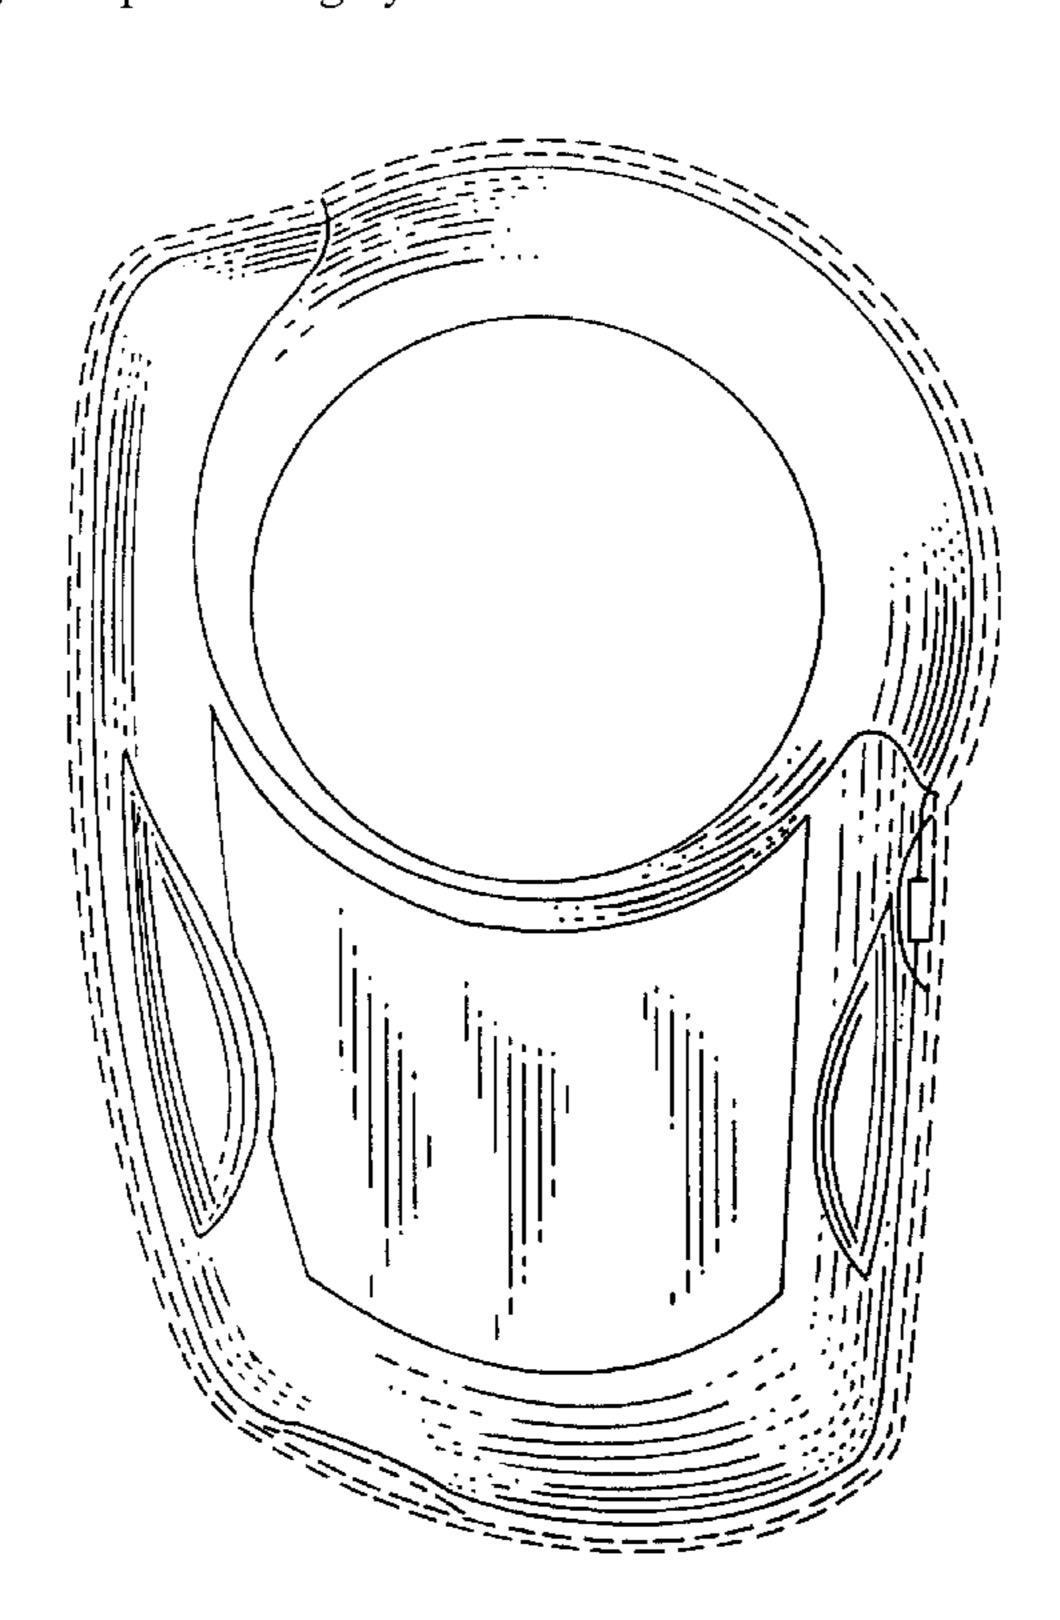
is a top elevation view of the housing shown in FIG. 7;
